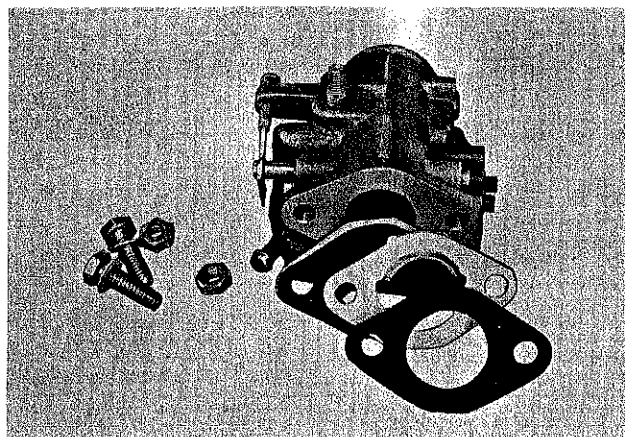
Note that the McCulloch carburetor adapter plate has a flange on one side of the airbox opening. This flange must be on the upper side of the opening to prevent misalignment when the carburetor mounting screws are tightened.
